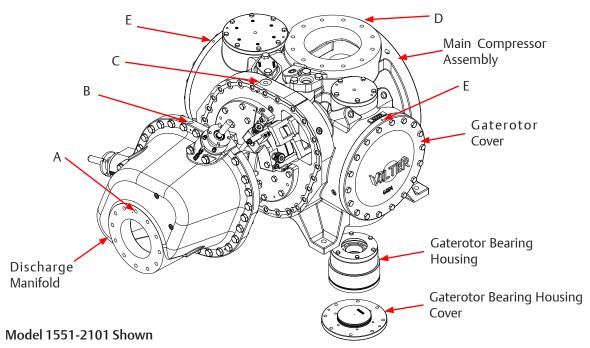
Bare Shaft Compressor Lifting Points and Component Weights
